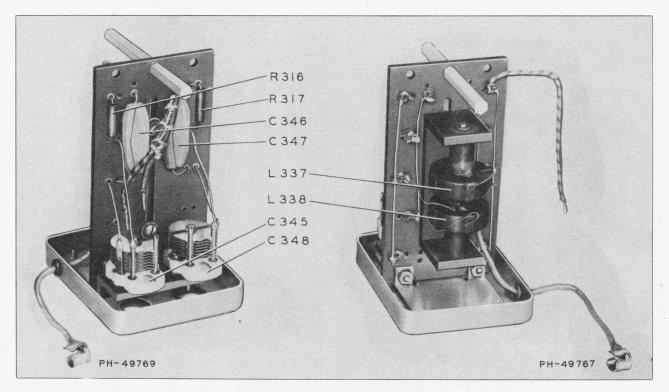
Typical Circuit Assembly (Third Stage, 50 KC Section, Front and Rear Views)
